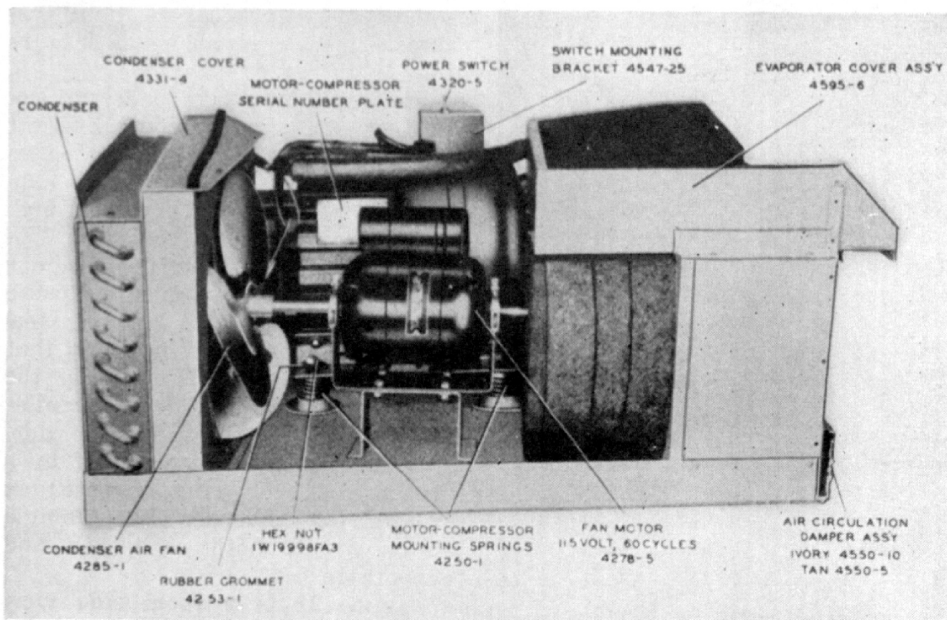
Chassis view of Philco-York unit. Blower type fan is used on evaporator side and propeller type for condenser.
